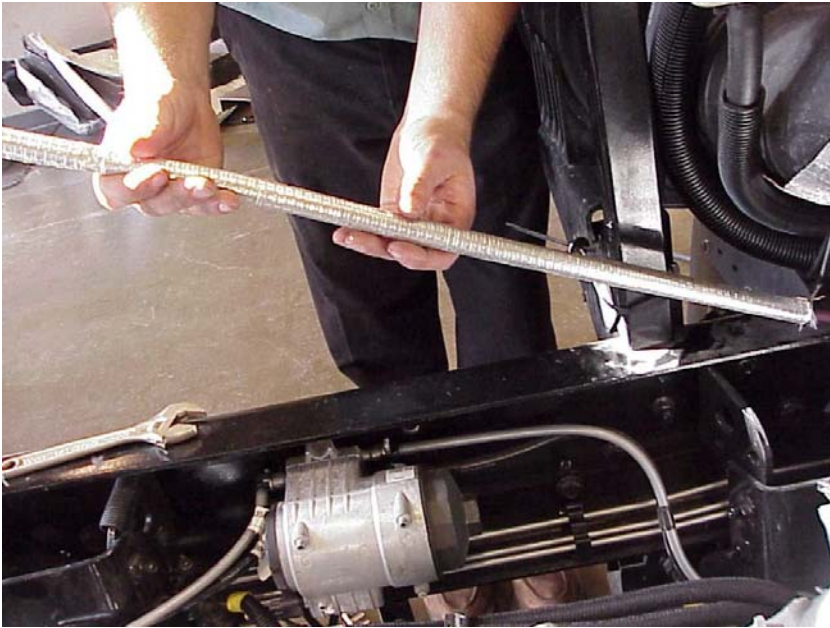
Install (Slide) Heat Shield onto Shift Cable
